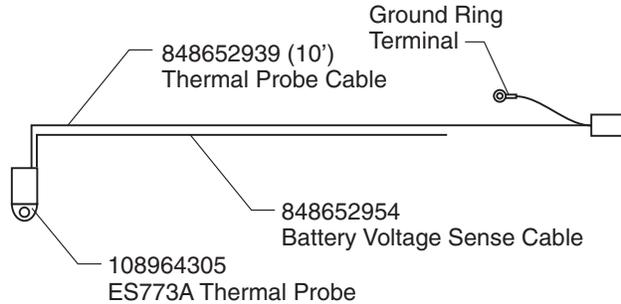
Sealed VT-Probe Cable Assembly (848680971)
